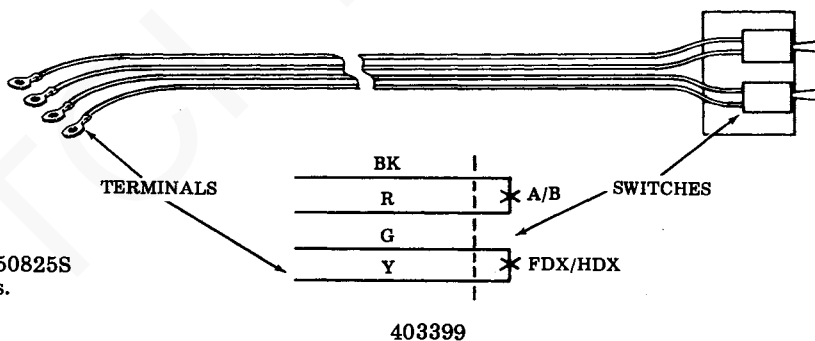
401640 Printer Extension Cable Assembly (EIA)
